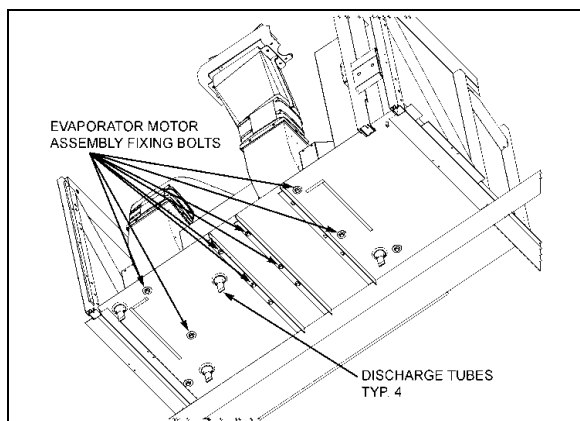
EVAPORATOR MOTOR ASSY FIXING BOLTS
